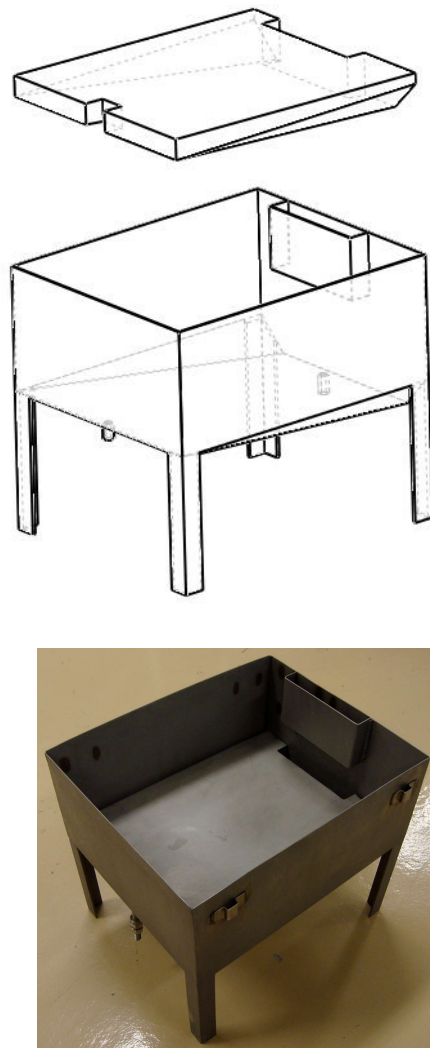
Top: Schematic of insert design with dimensions. Bottom: Photograph of vat.
